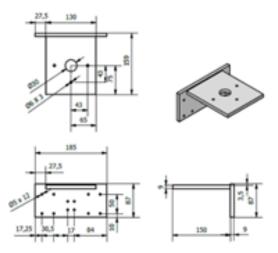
Design of the Motor Mount Frame for the Paint Mixer Machine
